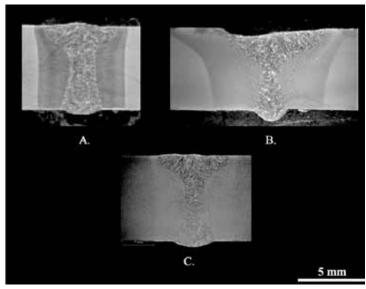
Cross-section micrographs of the laser weld samples: (A.) P91 Keyhole, (B.) P91 Hybrid and (C.) Eurofer97 Keyhole.
